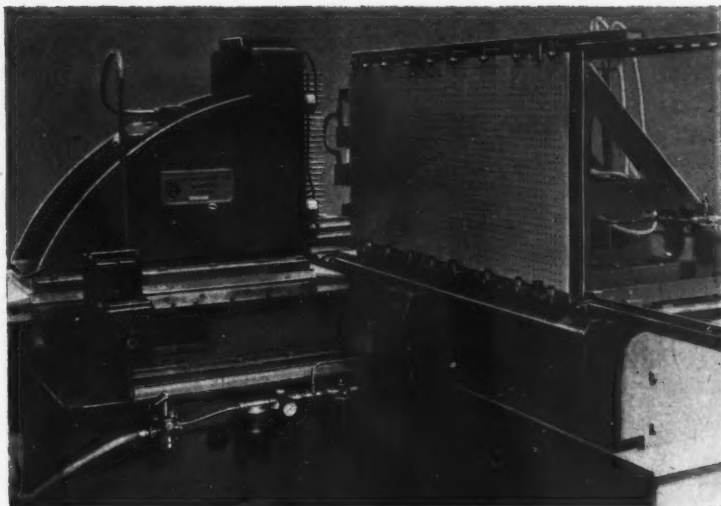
A 60-spindle unit head machine for drilling holes in acoustic-insulating boards on an automatic cycle. The slide for the work-holding fixture is indexed by an air cylinder, and located at the various drilling positions by pins in conjunction with an air-operated plunger
